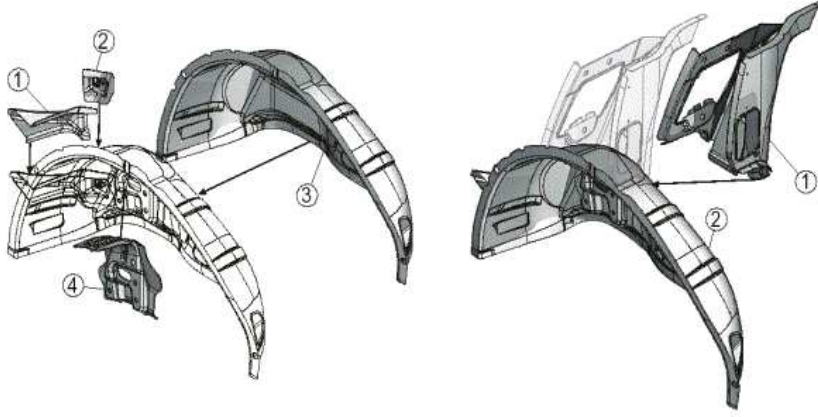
The rear wheelhouse consists of five parts. The parts are assembled in two stages.
